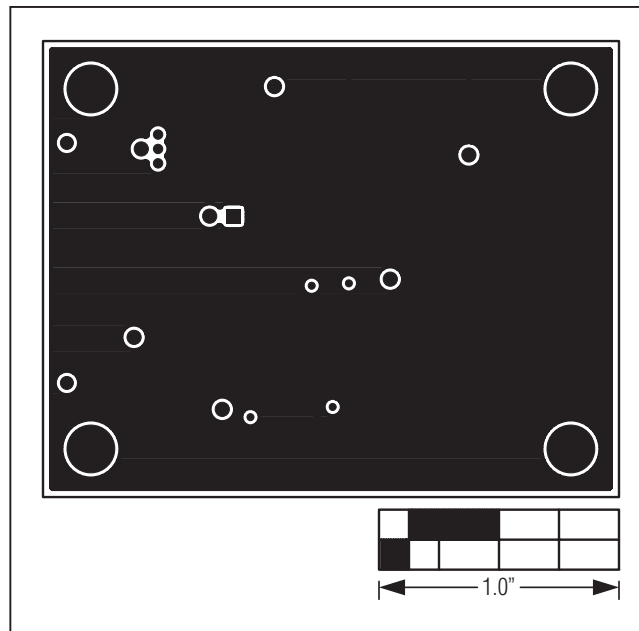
MAX16907 EV Kit PCB Layout—Layer 2
